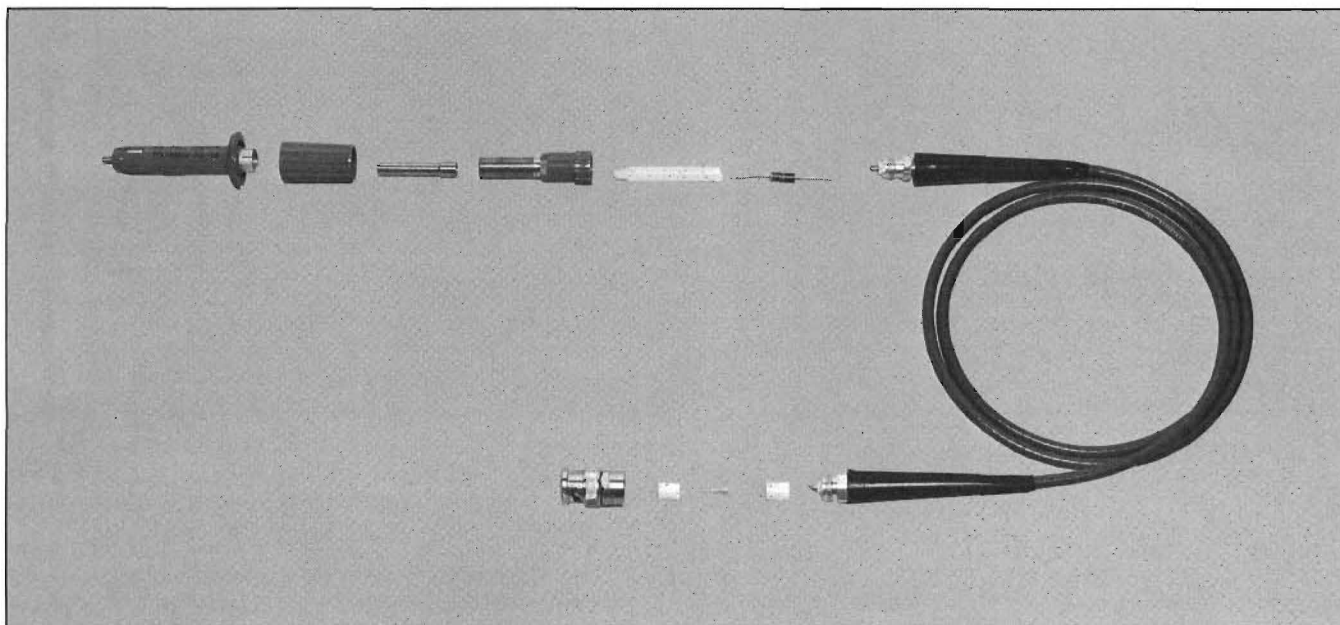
The P6006 Probe disassembled to show the individual parts making up the probe.
